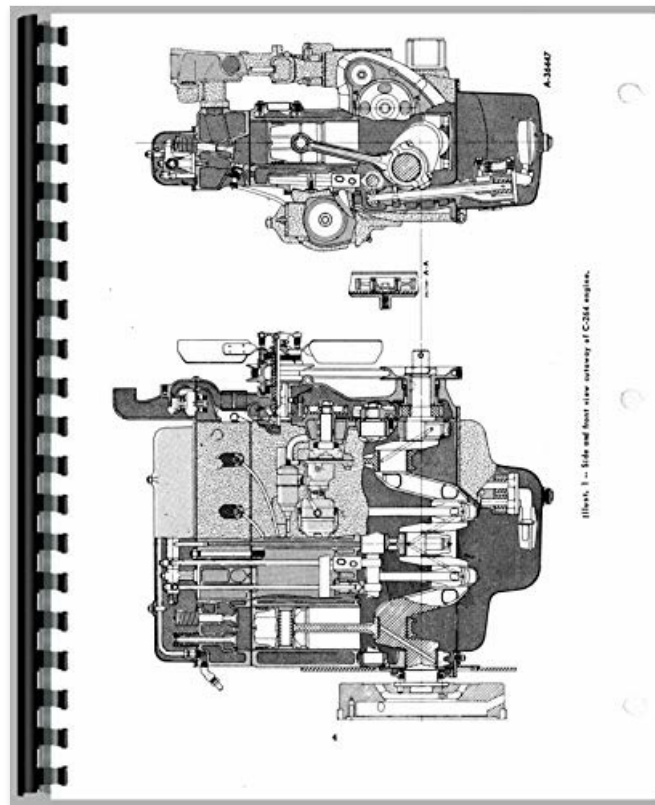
Image: Illustration 1, showing a side and front cutaway view of the C-264 engine, detailing internal components and their arrangement.
